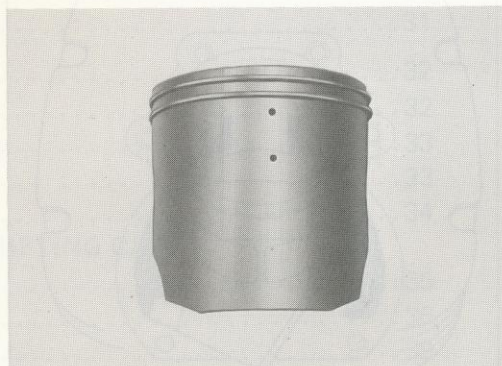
Piston for RM250 and RM370 (with two oil holes)
